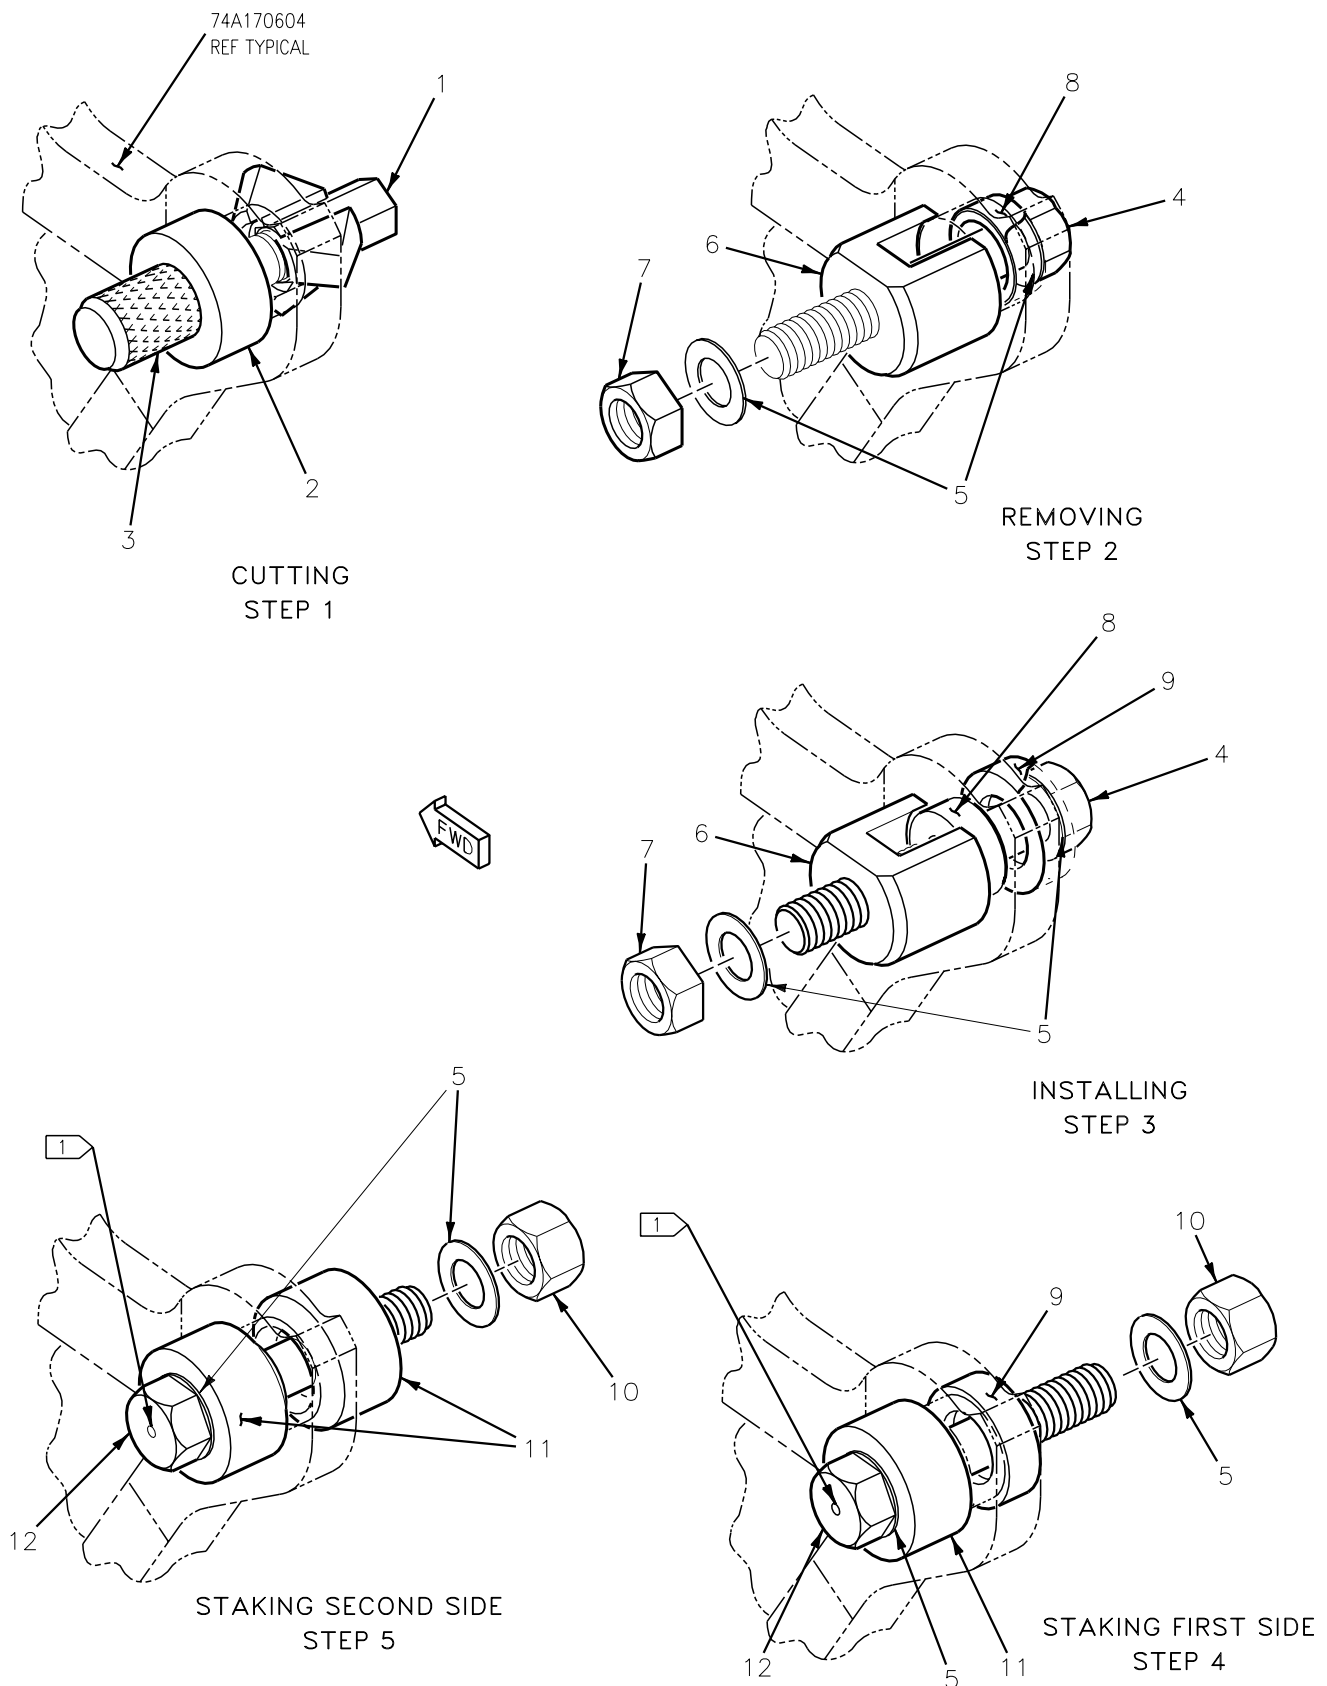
Working MS14103-8 Bearing in 74A180685 Outboard Hinge Trailing Edge Flap Rib (Sheet 1)
